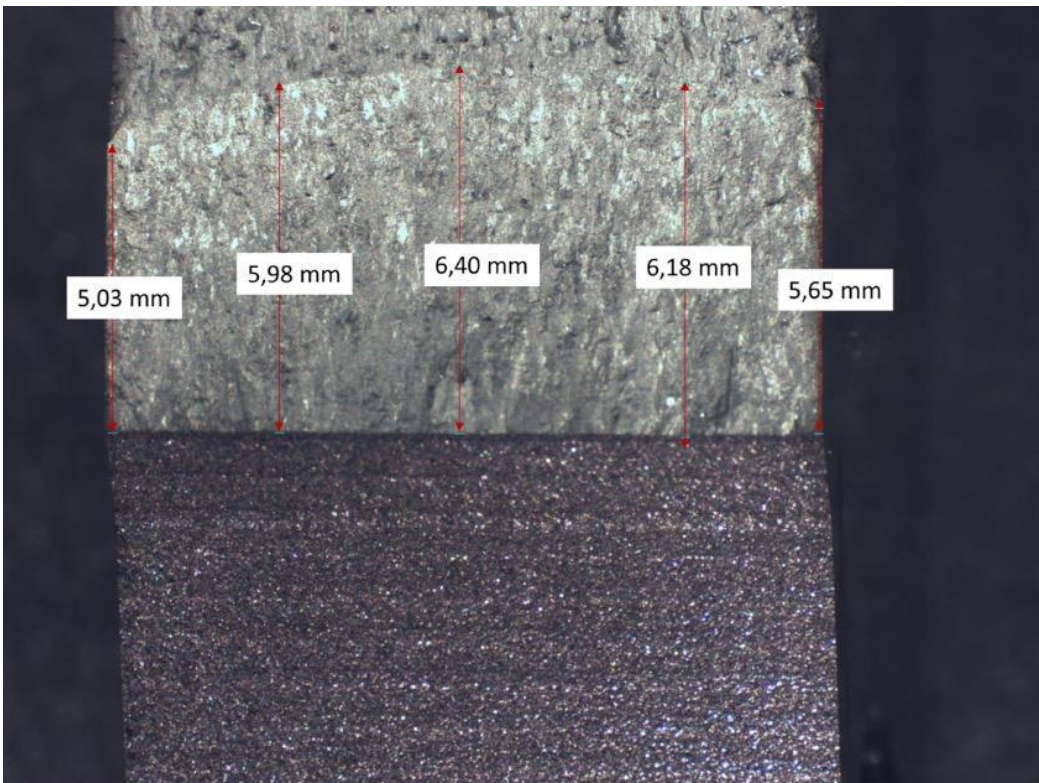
Fracture toughness crack measurement for 6.5 m/s
